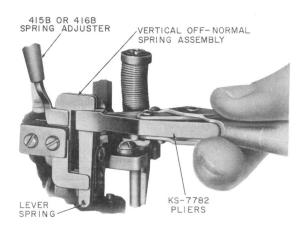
Method of Adjusting U-Shaped Springs on Vertical Off-Normal Spring Assembly
